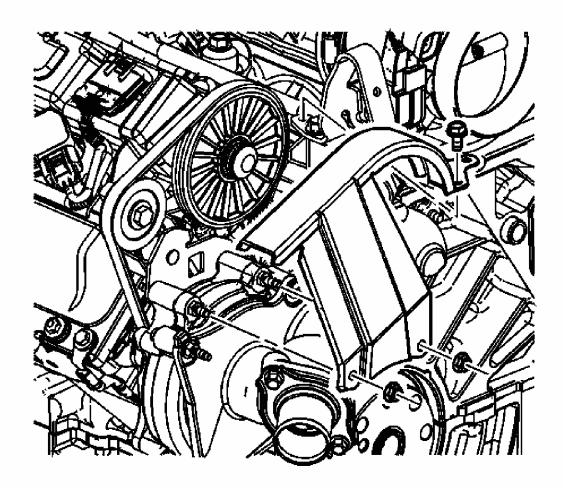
Identifying Water Pump Drive Belt Shield Bolt & Nuts Courtesy of GENERAL MOTORS CORP.
